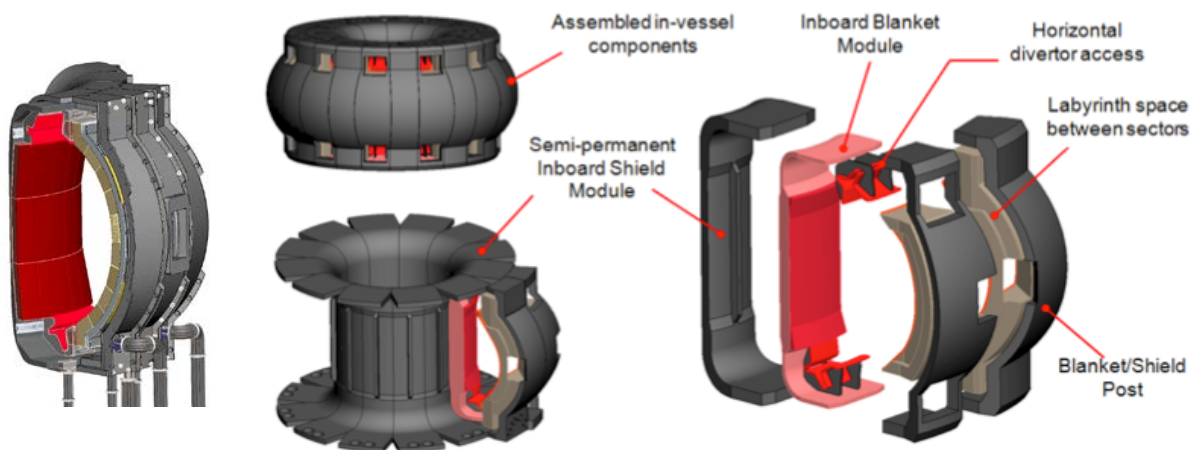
K-DEMO in-vessel systems, coolant feeds, and exploded details.
